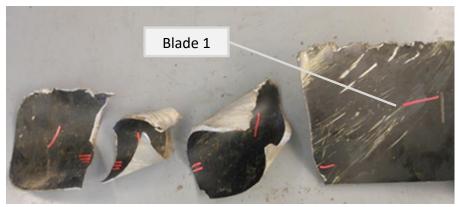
The three separated blade pieces from propeller blade number one. Markings inserted by SHK. Photo: Hartzell Propeller Inc.
